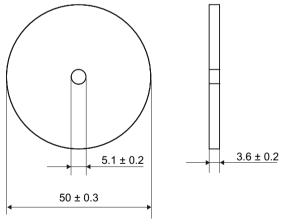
Dimensional drawing of MDS D526 All dimensions in mm 8.29 MDS D528
